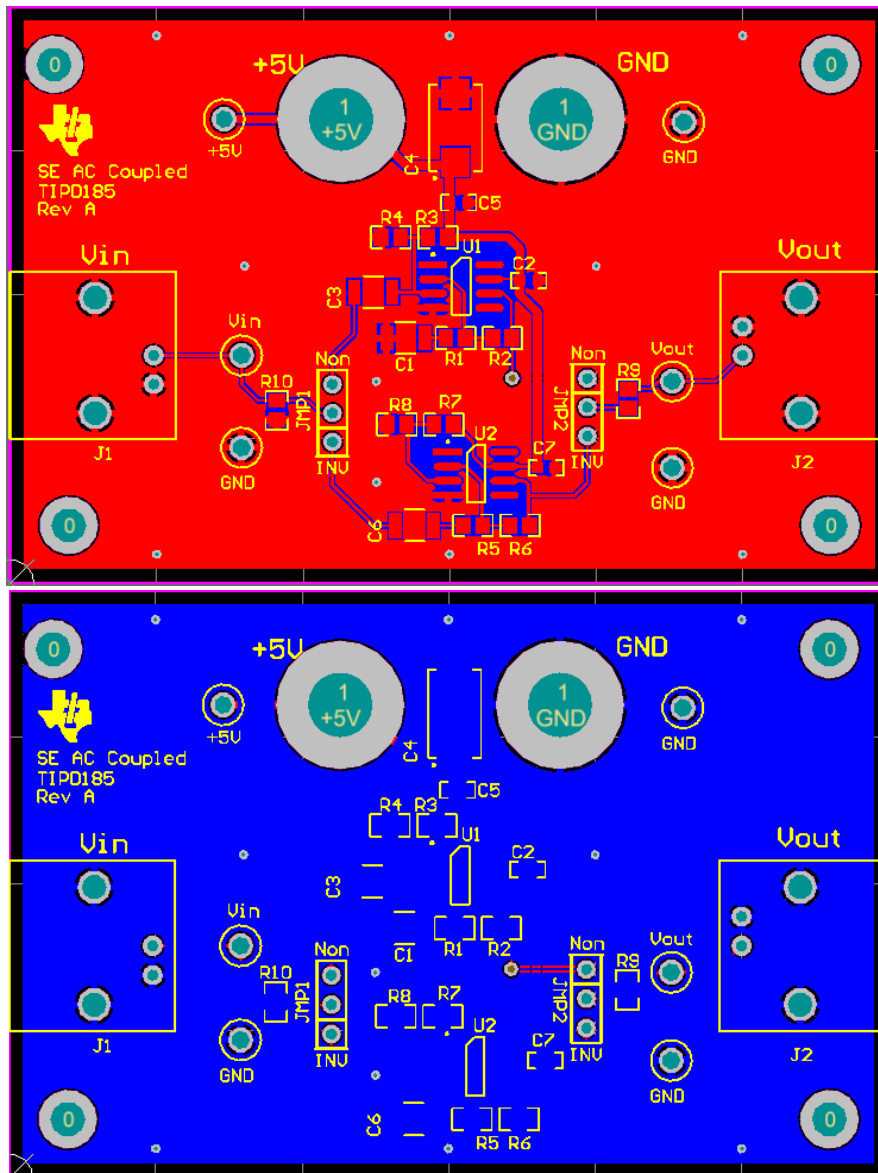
PCB Layout (Top - Red, Bottom - Blue)
